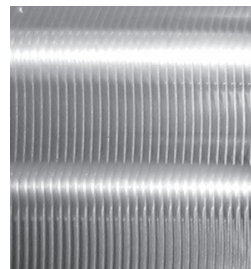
Fin shape of test machine 1 Fig. 2 Fin shape of test machine 2
